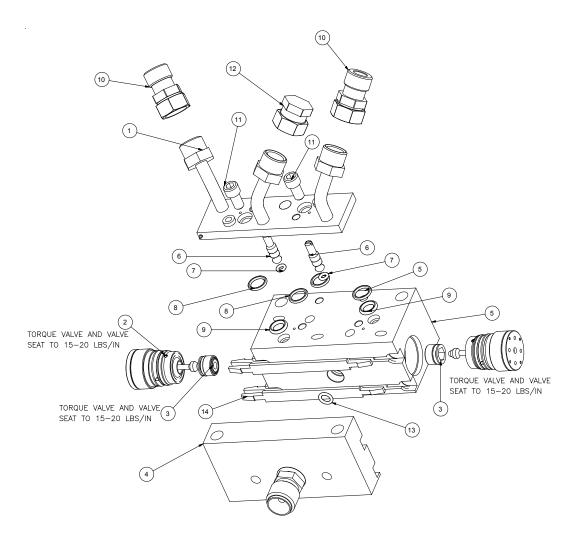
78075-01 & 78075-03 Bell Wash Assemblies
